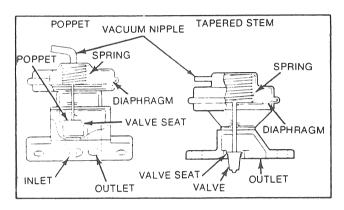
Internal design of typical EGR valves. (Courtesy of Ford Motor Co.)
